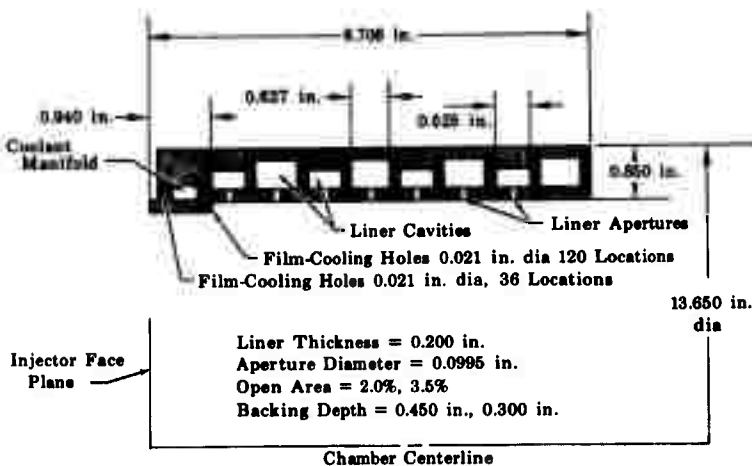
1000-psi Film-Cooled Liner Assembly FD 22239
